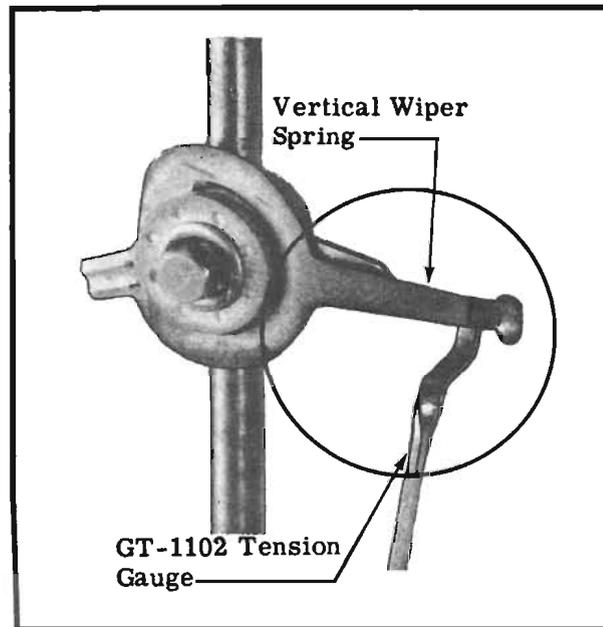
Tension Gauge is Being Used for Checking Vertical Wiper Spring Tension.
